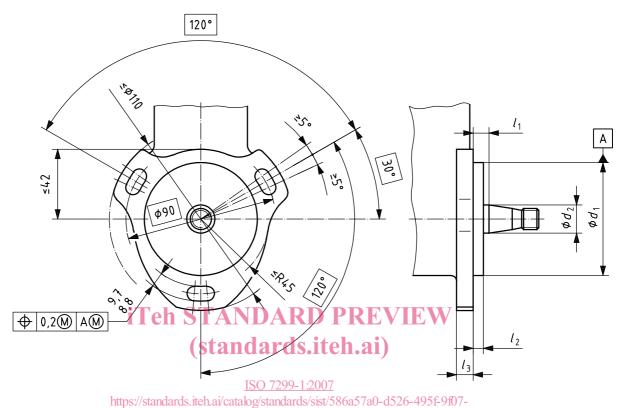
Fuel injection pumps — Type 4 end-mounting flange
